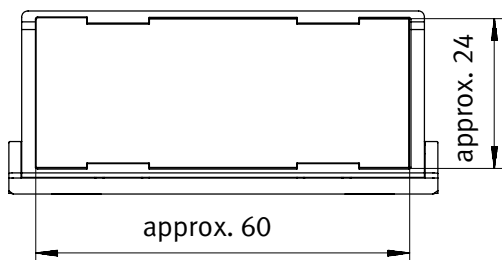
/6: Inscription label holders for EL modules, type ASCF-H-E2 (dimensions in mm)
